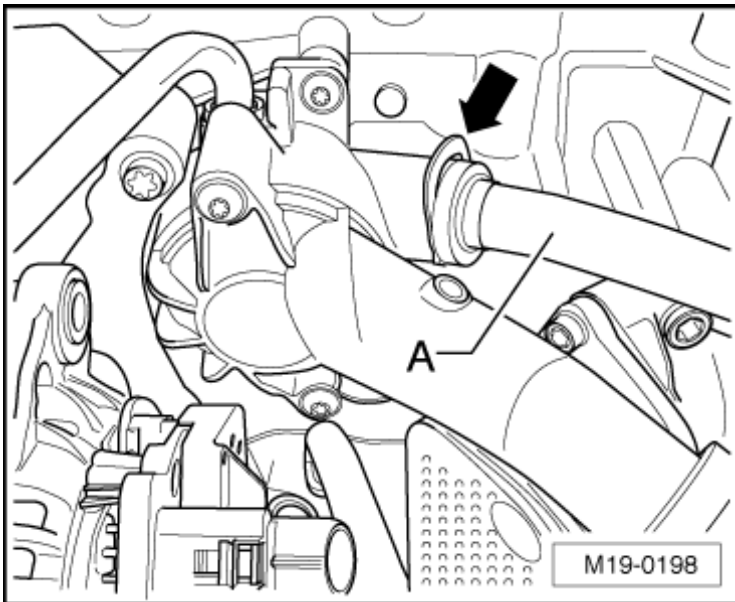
Pulling Out Retaining Clip And Removing Coolant Pipe
